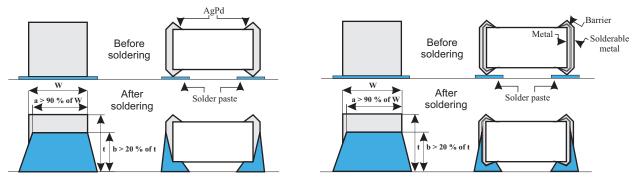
Soldering Criterion in case of Wave and IR Reflow Pb-containing Soldering
